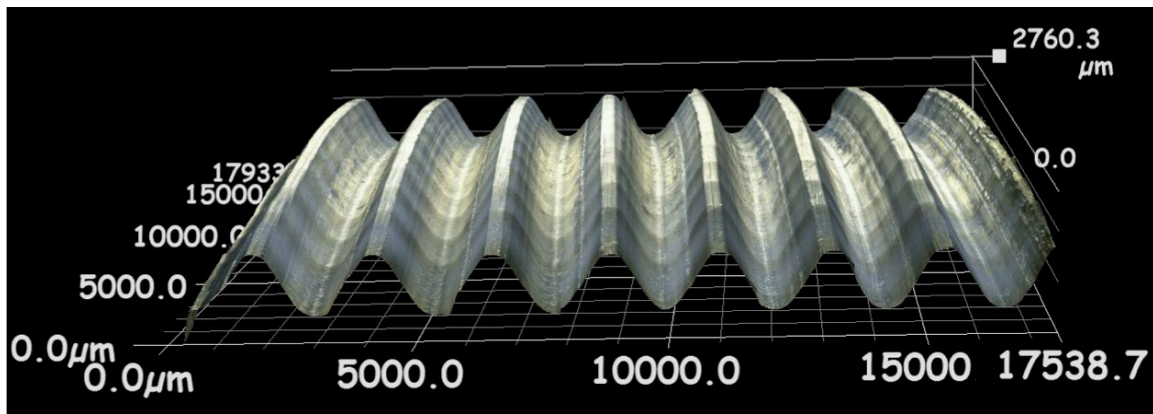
3D scan of threads machined into the pure aluminum cold sprayed coating.
